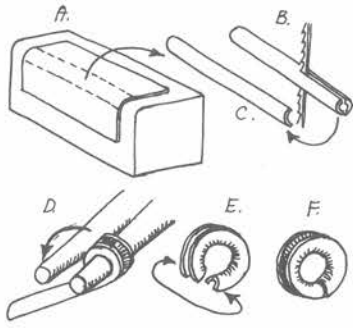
Fabrication of thimbles. Bending and trimming soft copper or aluminum (A) or splitting $\frac{1}{16}$ " aluminum tubing (B) will produce basic stock (C), which is formed by round-nose pliers (D), trimmed and closed (E) to make a finished thimble (F).
